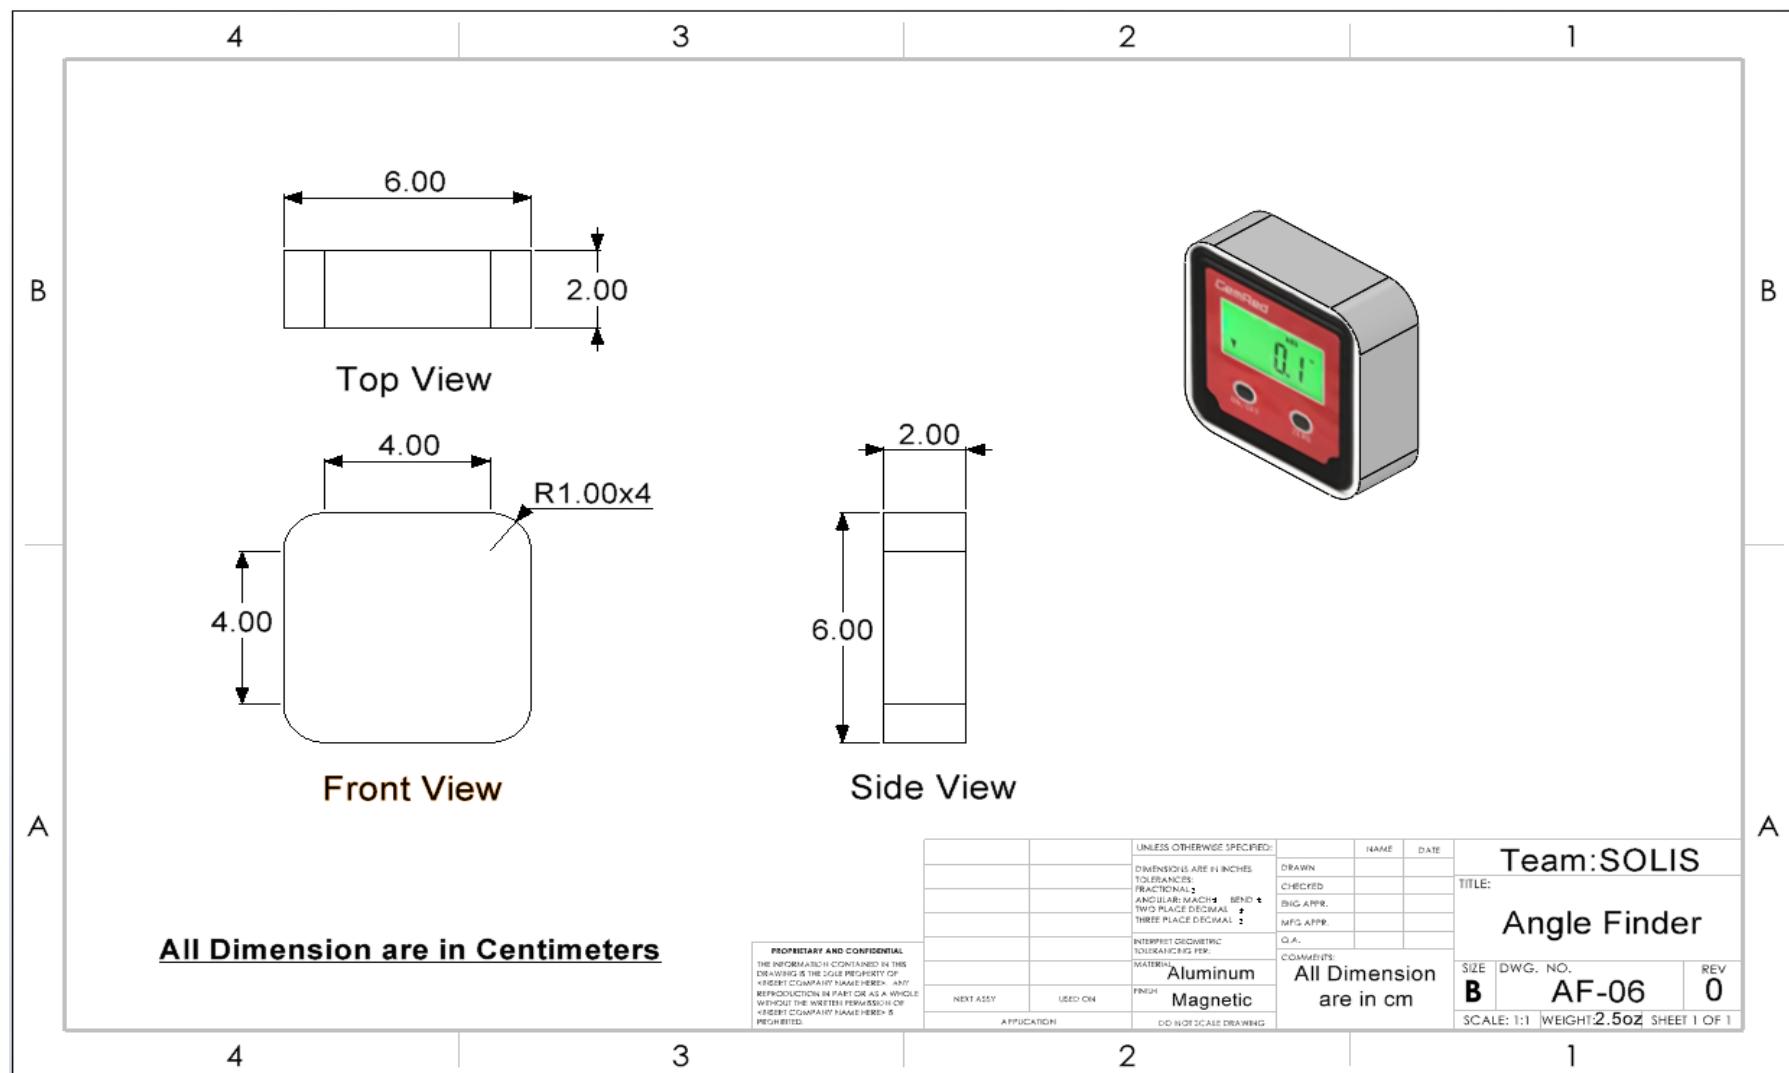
CAD Draft Sheet of the Angle Finder Device.
